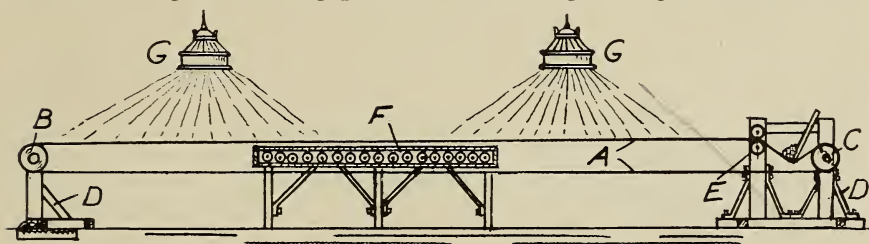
THE BURR ELECTRIC LIGHT VULCANIZER.
